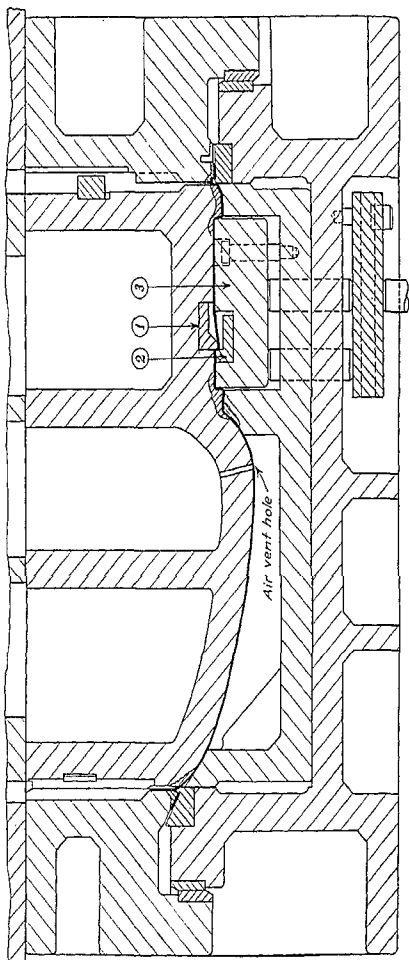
Third action of the press used to lance blank and final form. (Ford Motor Co.)
